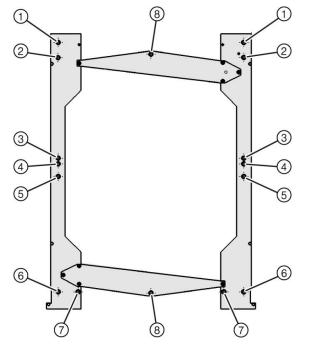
Drilling template, arrangement for 1000 mm panel width as an example
